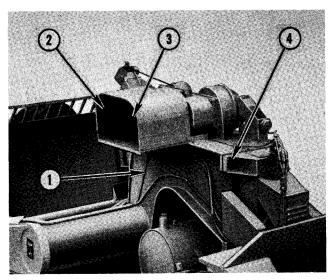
STEERING TRUNNION AND YOKE 1. Yoke 3. Hoist Motor 2. Apron Motor 4. Bolt Bar Plug Bolts
